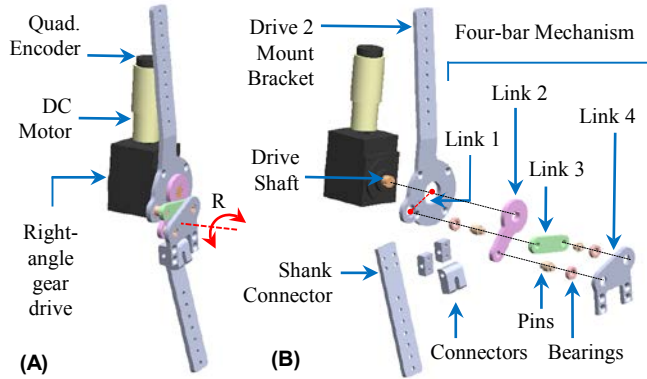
1-DoF knee mechanism with moving AoR technology: (A) assembly, (B) exploded view.
